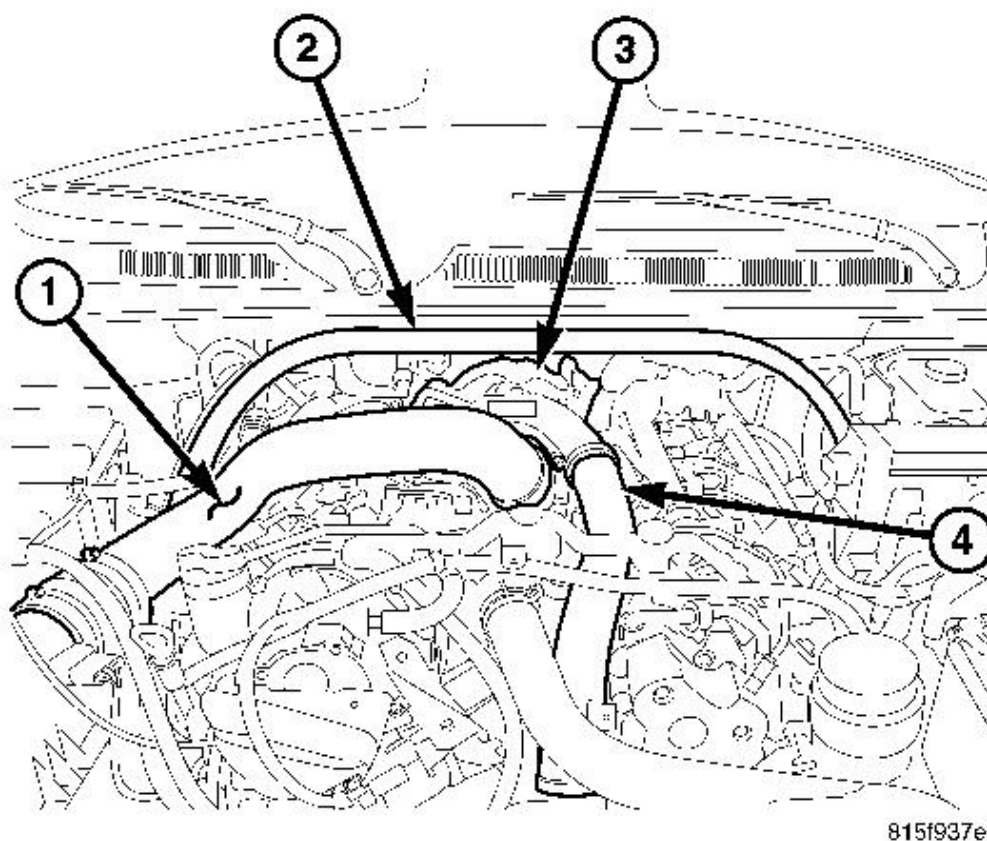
Strut Tower Support, Air Cleaner Outlet Tube, Turbocharger & Charge Air Inlet Tube
